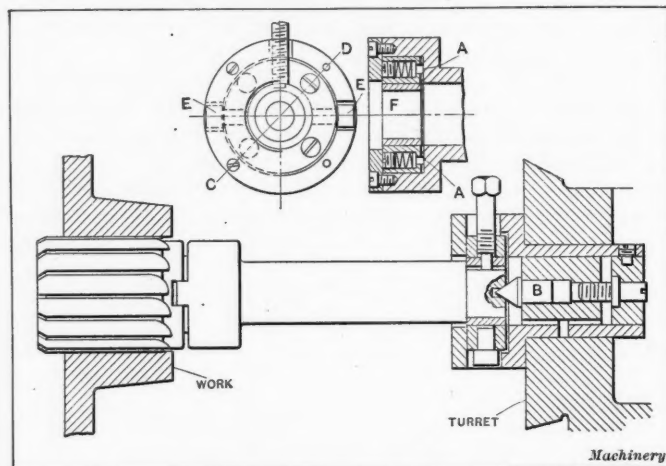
Pratt & Whitney Reamer-holder equipped with Spring Shoes and Center Support
